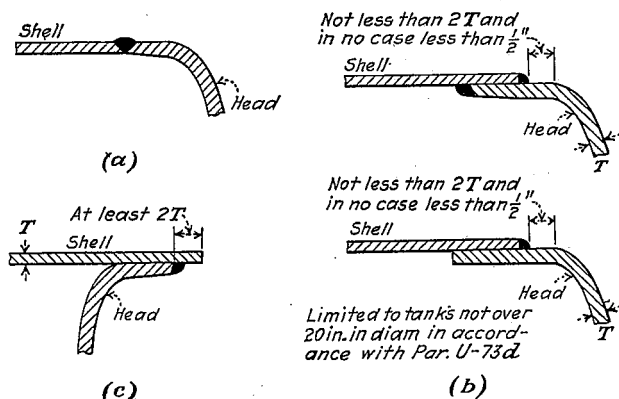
WELDED HEAD ATTACHMENTS
